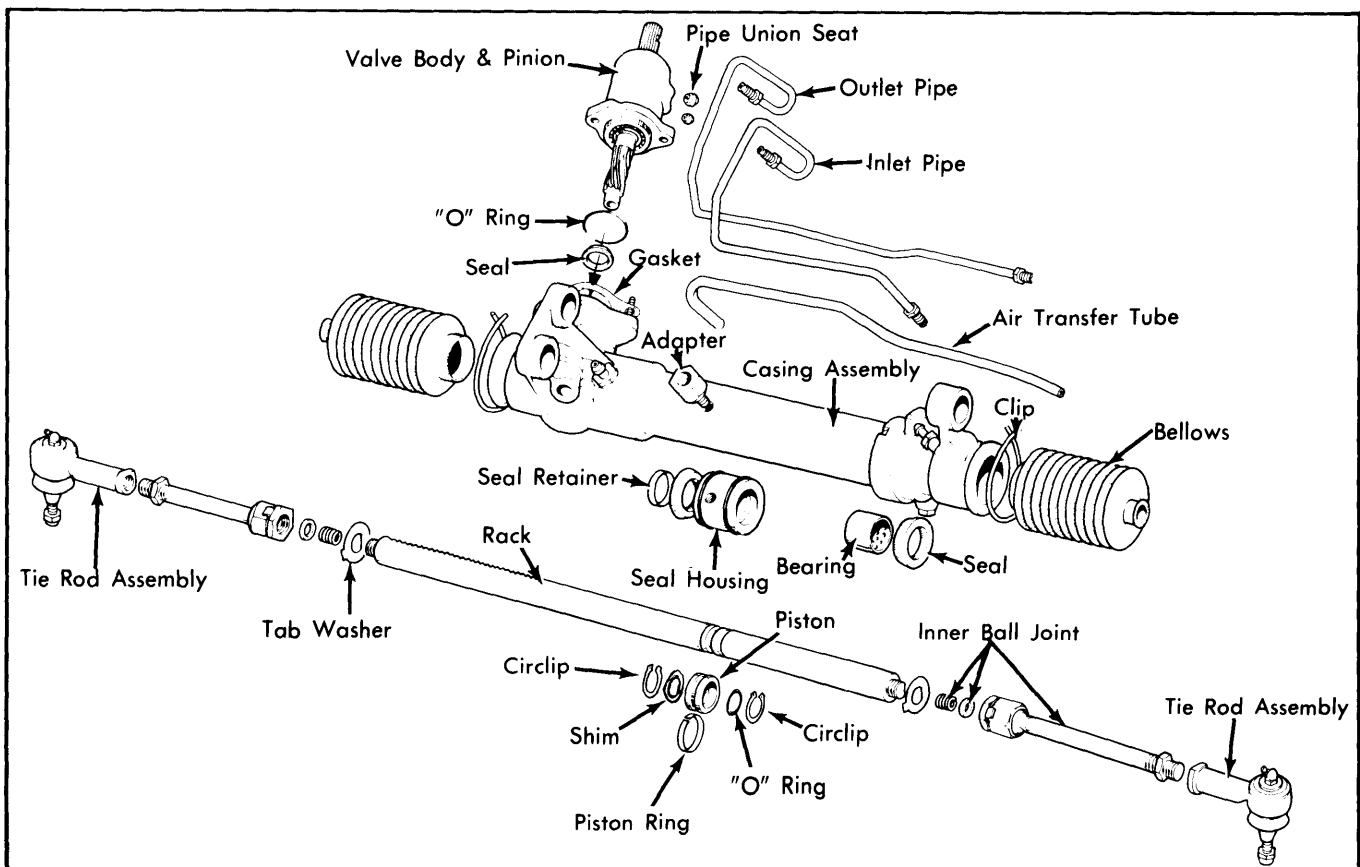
Exploded View of Power Assisted Rack and Pinion
